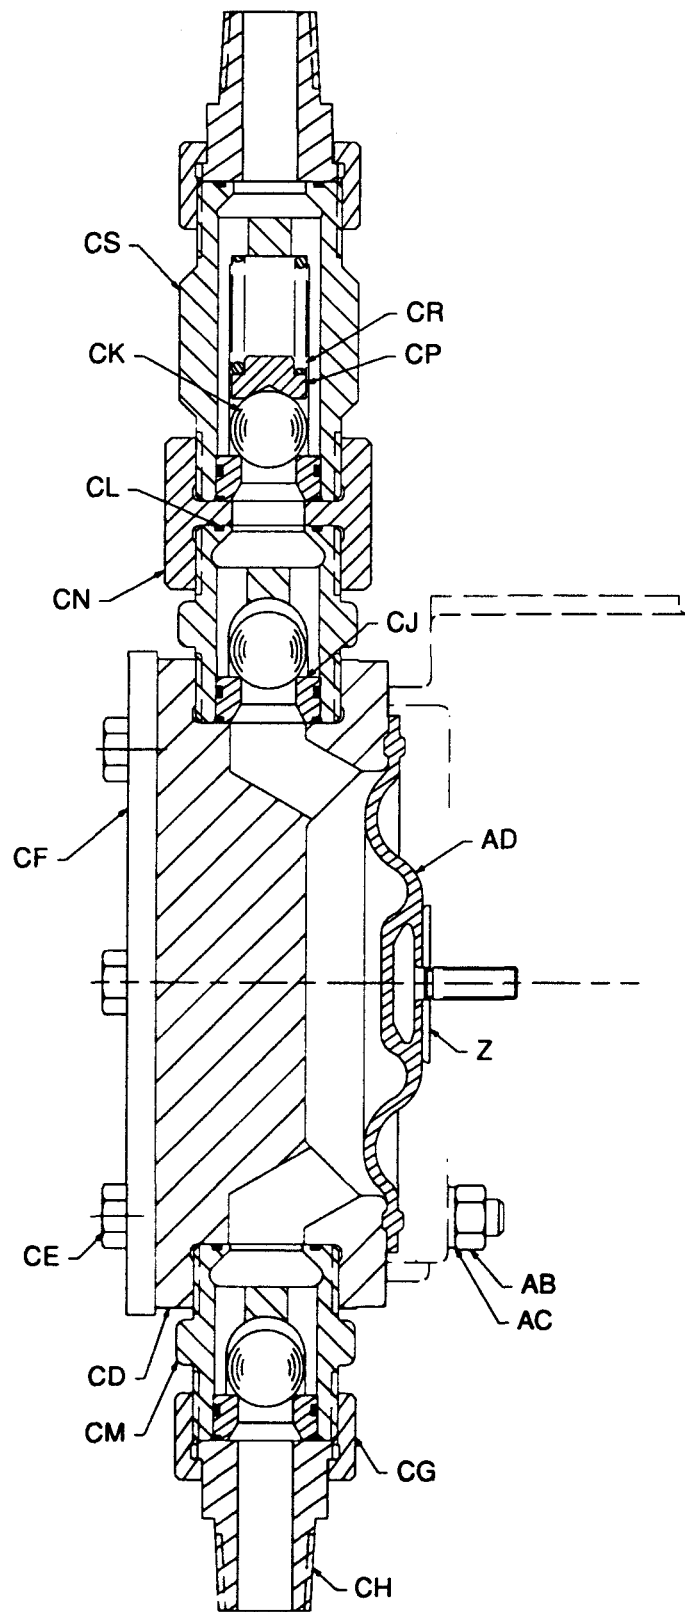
maxRoy Plastic Liquid End Parts Reference Drawing.
